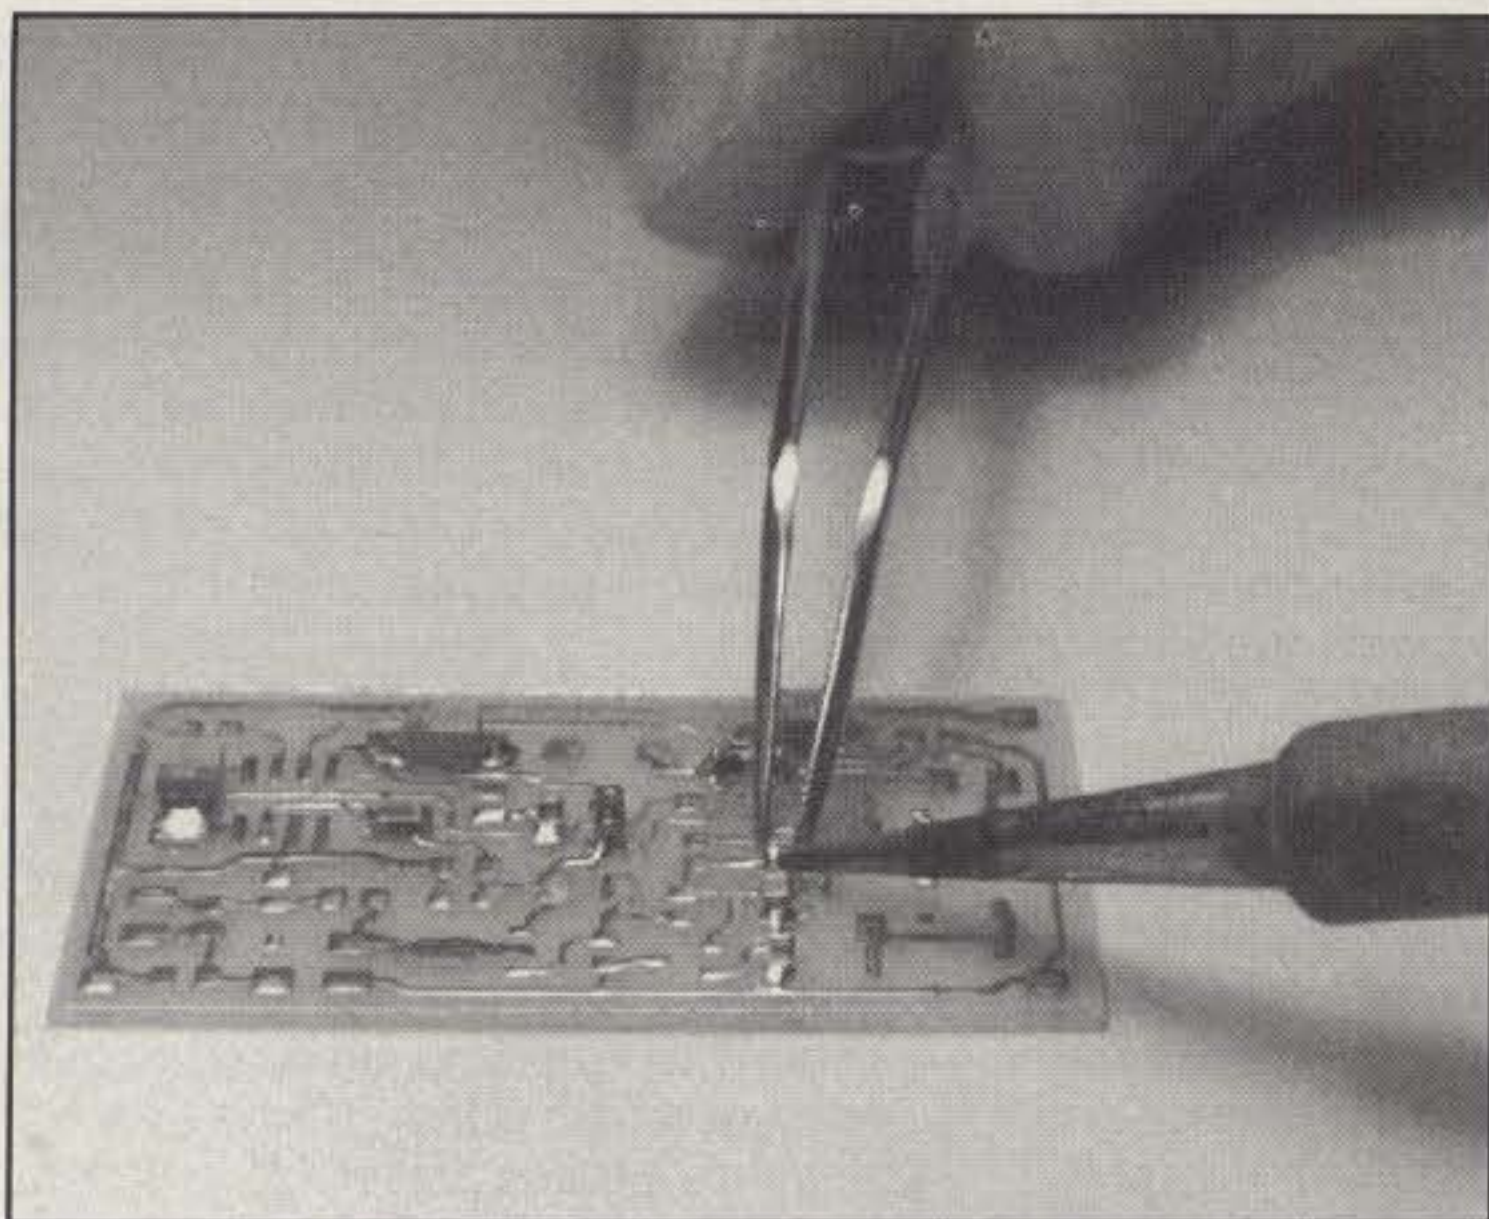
Here Bob, AE4IC, is using fine-tip tweezers to hold a resistor in position while reheating one of its PC board pads "prewet" with a bare touch of solder.
